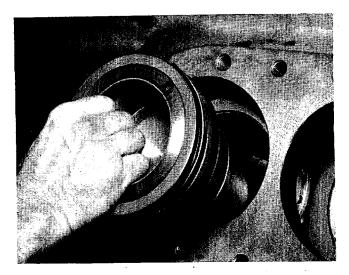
Installing Liner and Piston Assembly In Crankcase.
